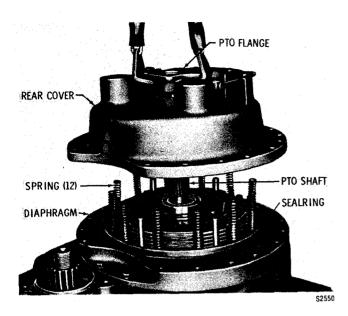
Removing rear cover assembly (TTB 2221-1, 2421-1 with converter-driven PTO)
